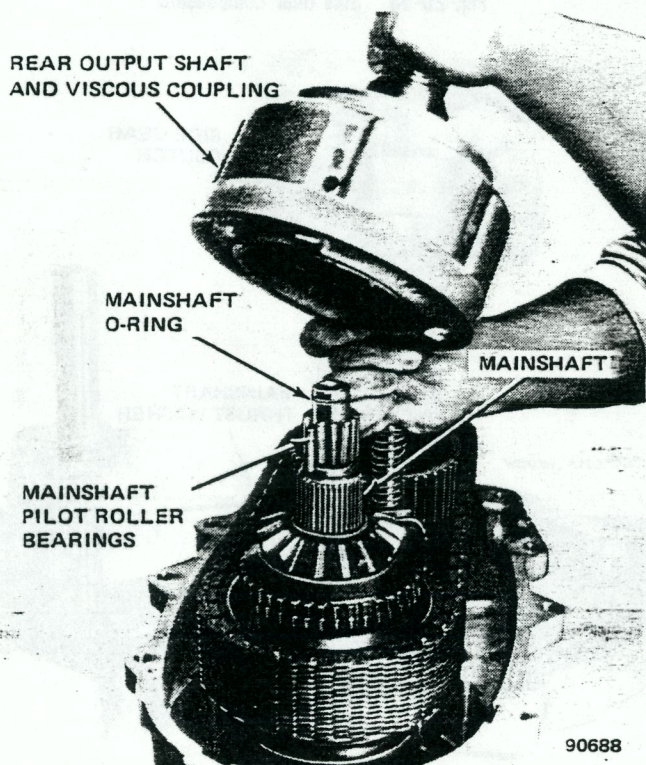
D-48 Viscous Coupling and Rear Output Shaft Removal/Installation
